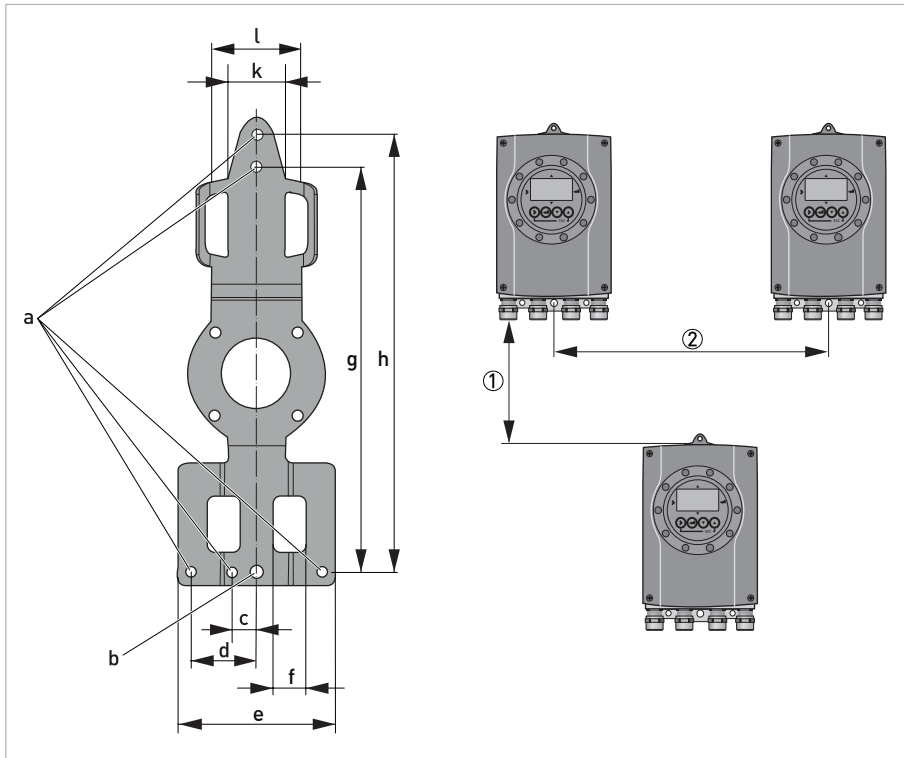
Dimensions of mounting plate and distances when mounting multiple devices next to each other
